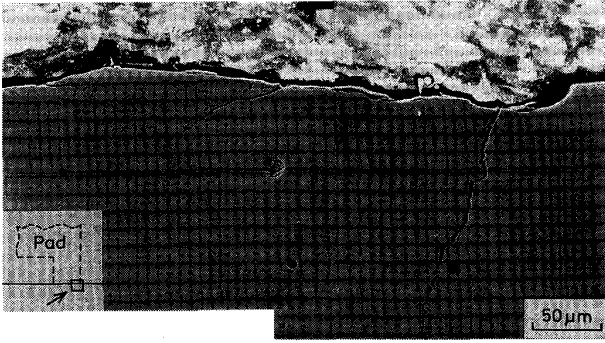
Longitudinal section through fretting scars in 880 MPa grade steel specimen tested in air at a stress amplitude of 351 MPa. Cycles to failure : 5.5×10^4 . An arrow indicates the section observed.
